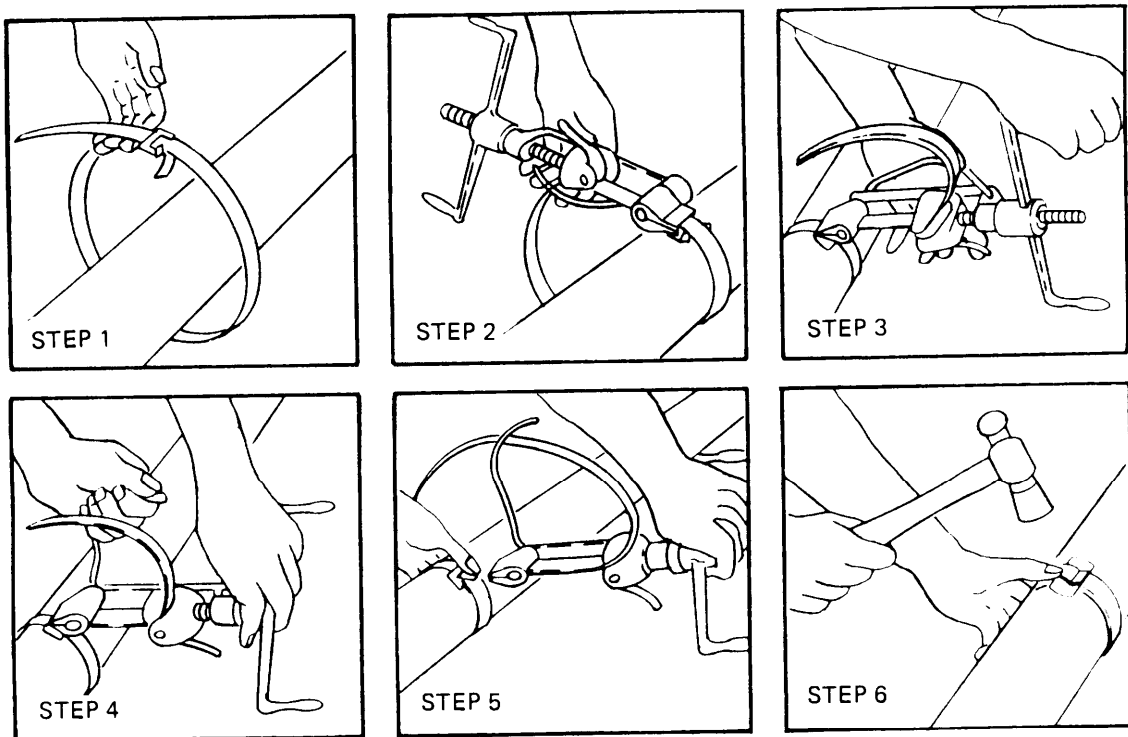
Hose Assembly Repair Using Clamping Tool C001.
